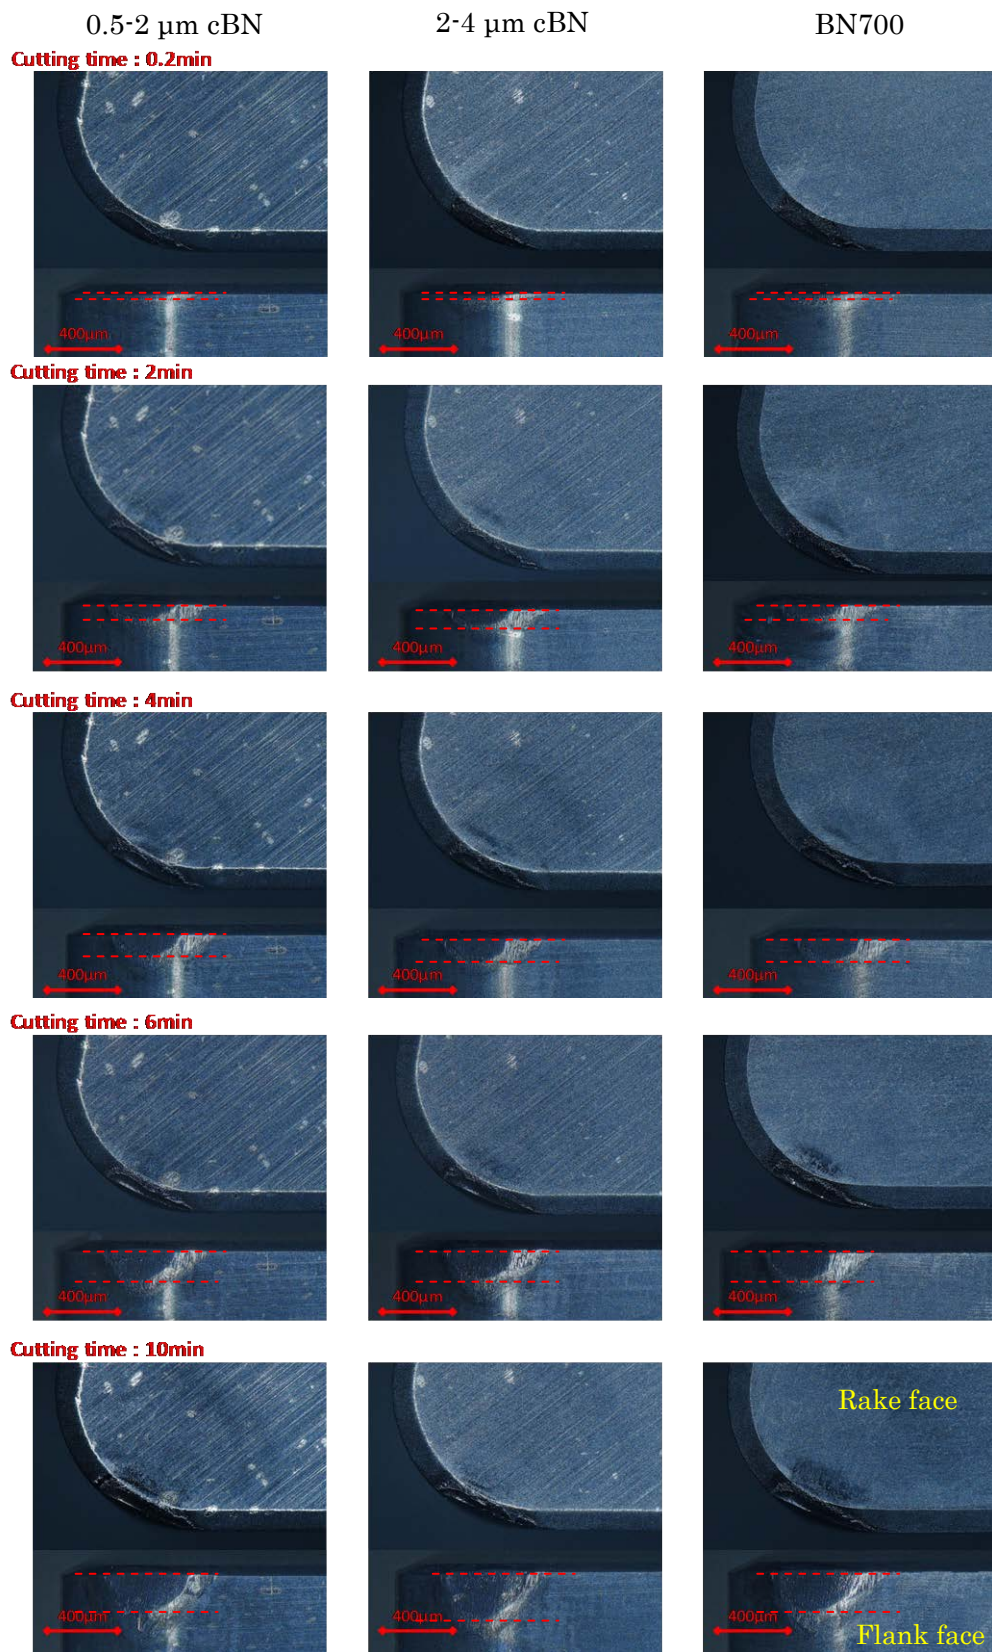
Tip-edge of the PCBN cutting tools after finishing of FCD700.
